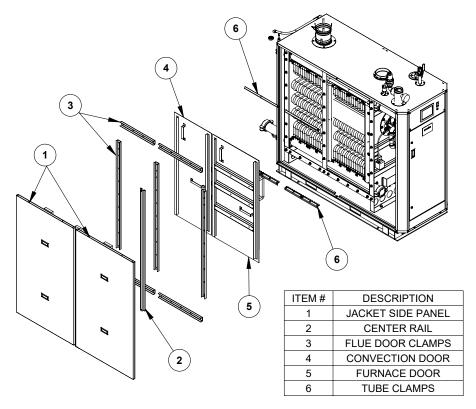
Panel Removal in Preparation for Tube Inspection - 1000
